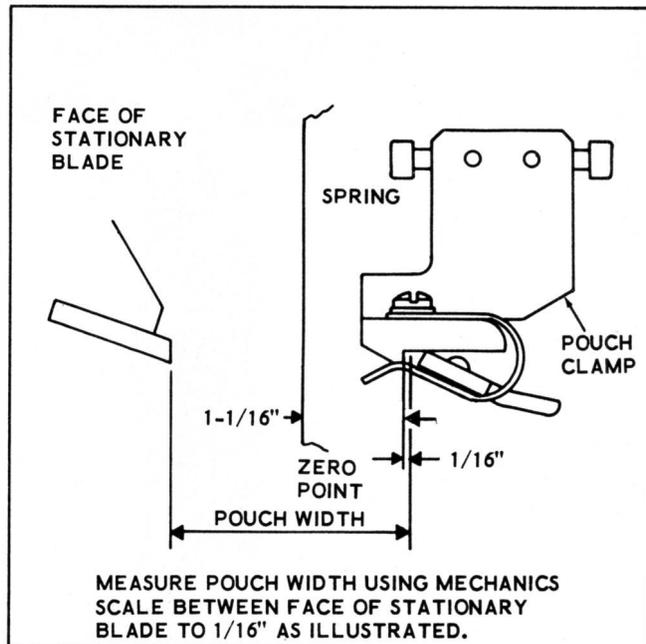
Measuring Pouch Width from Stationary Knife to Pouch Clamp
